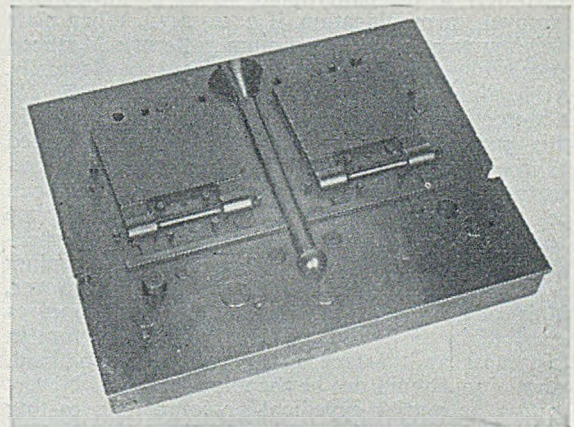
Bronze Double Test-bar Patternplate, size 14 by 18 in.
